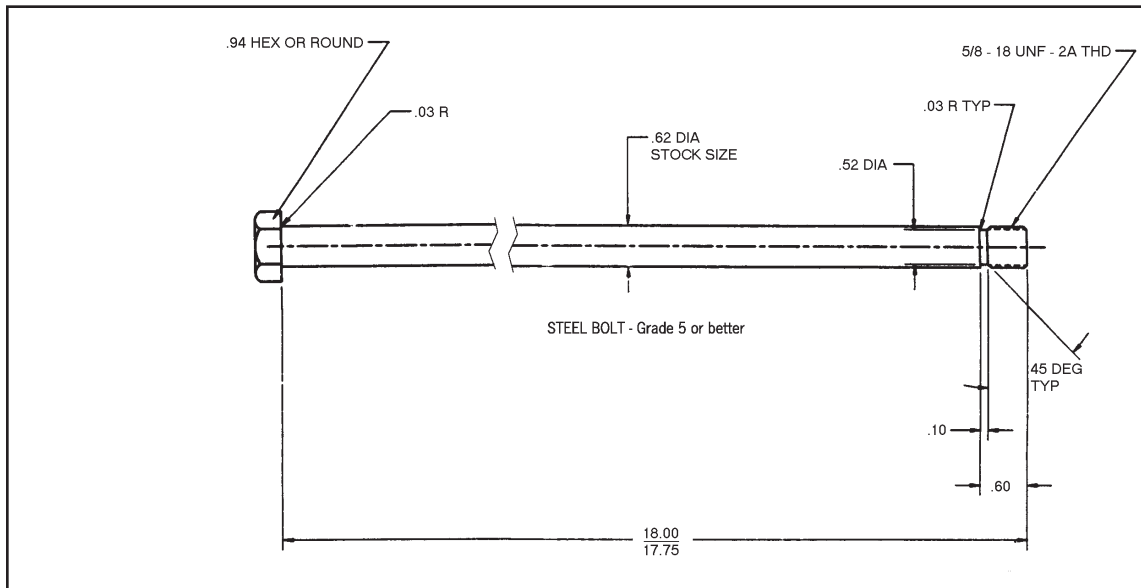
Puller (1421459)–Used with hammer 1421460.
